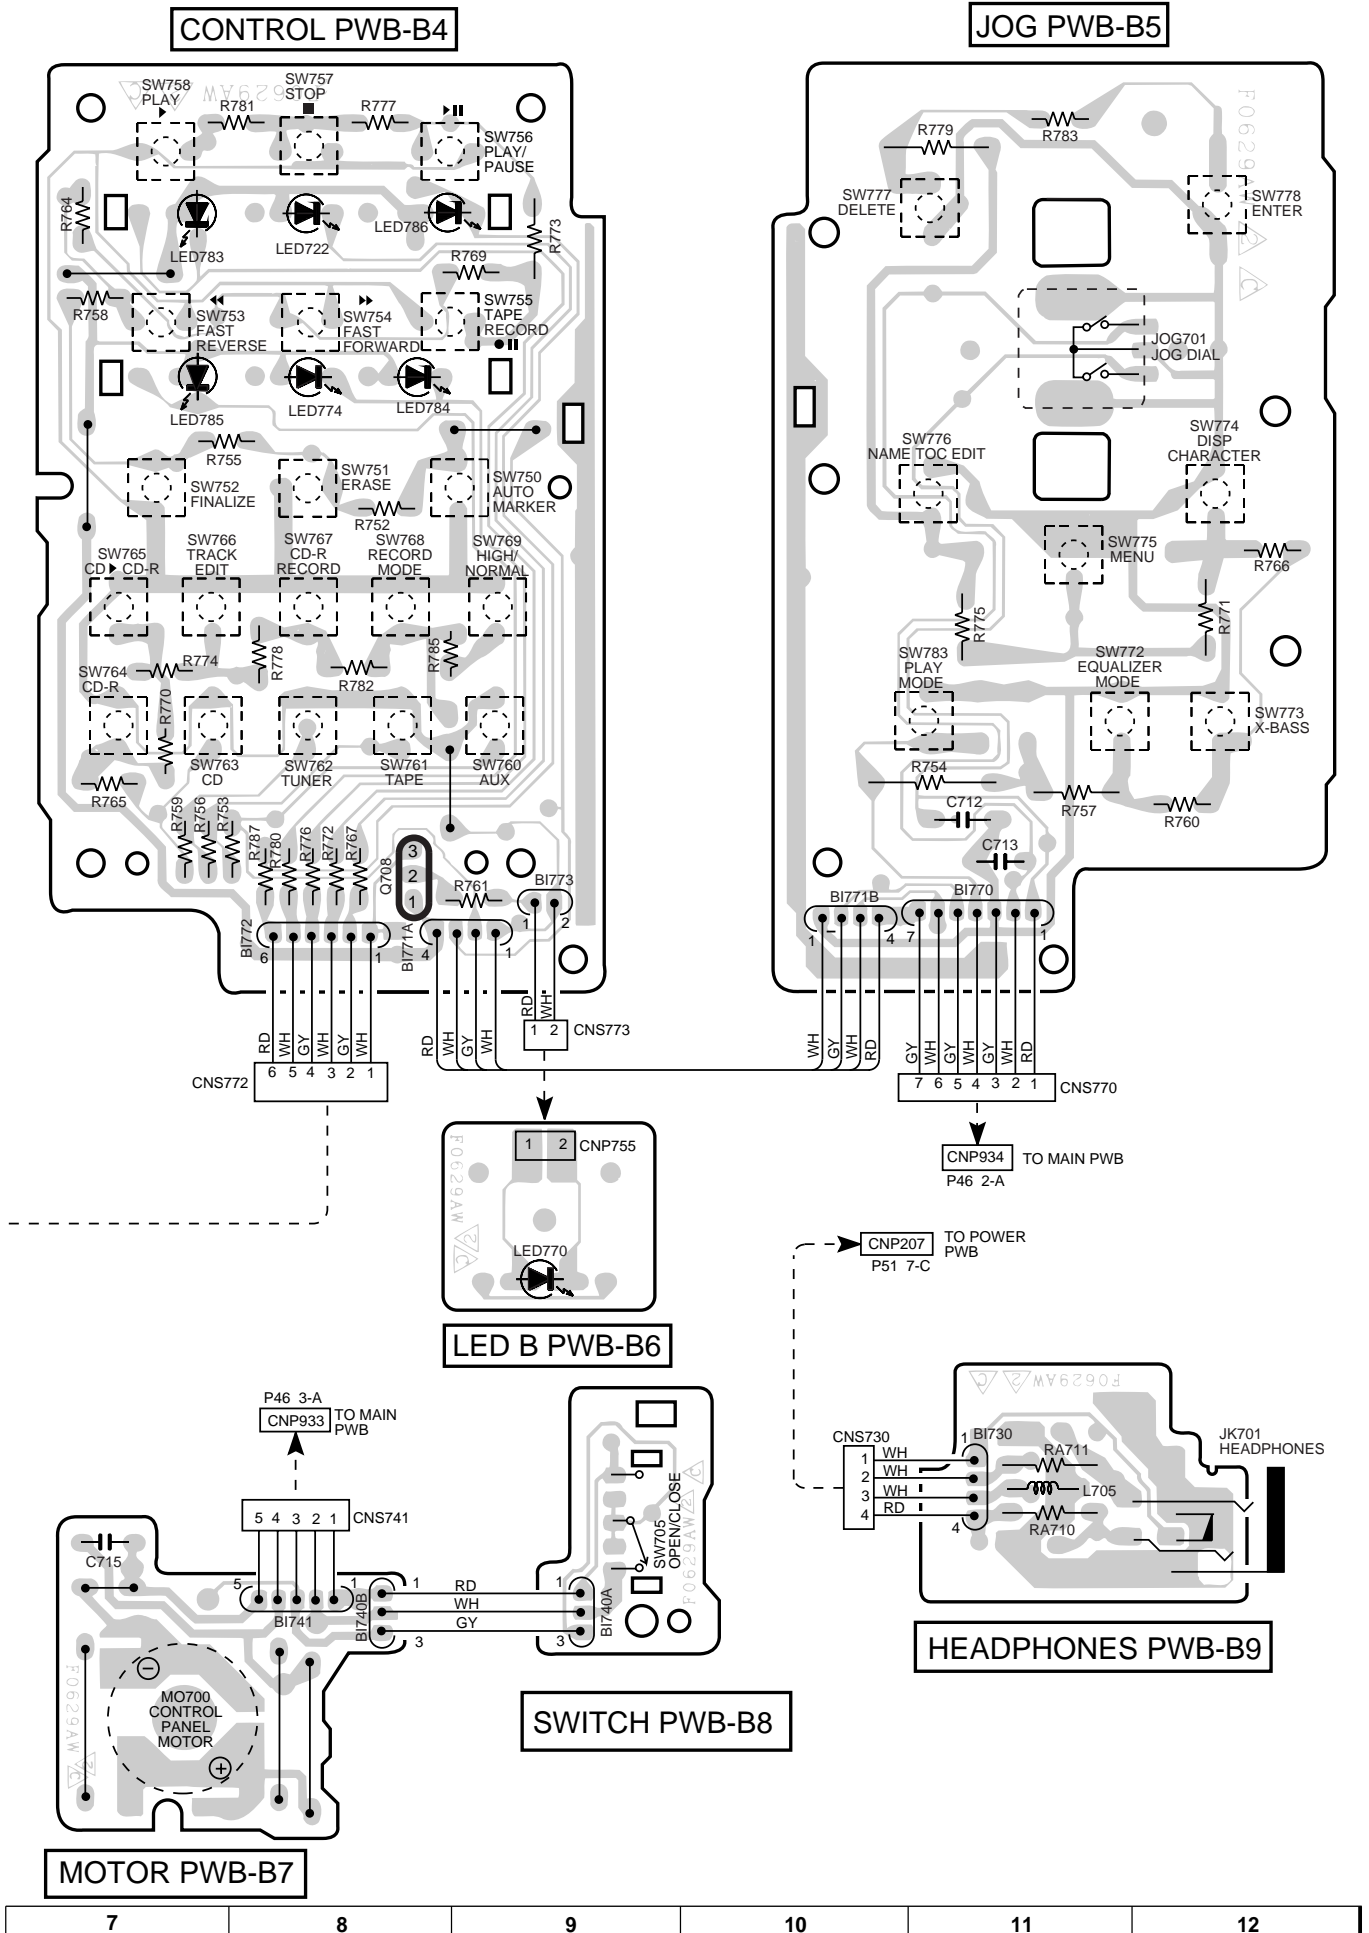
WIRING SIDE OF P.W.BOARD (3/9)
